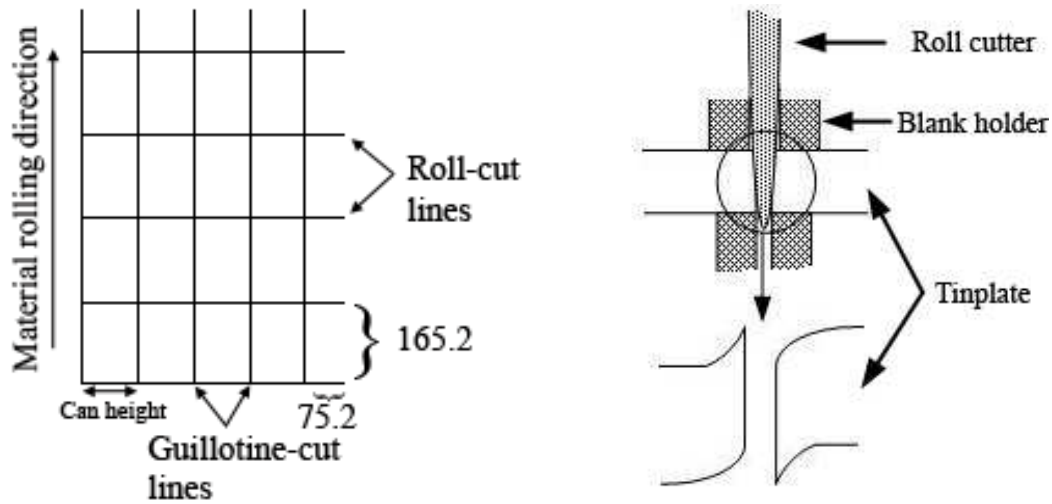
Principles of the cutting operation: on the left-hand side a schematic of the cutting scheme from the large 950 x 950 mm tinplates is shown for c-grain oriented containers, the sizes are in mm. The picture on the right-hand side shows the schematic of the roll-cut mechanism introducing sharp tips at the bottom or top of the blanks.
